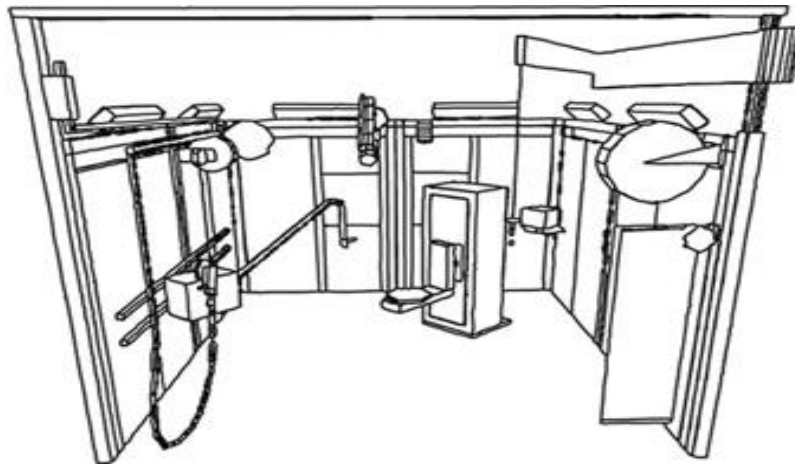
shows a welding workstation using a CAD system. It is a workstation that minimizes strength and posture requirements and meets almost all residual user requirements.
